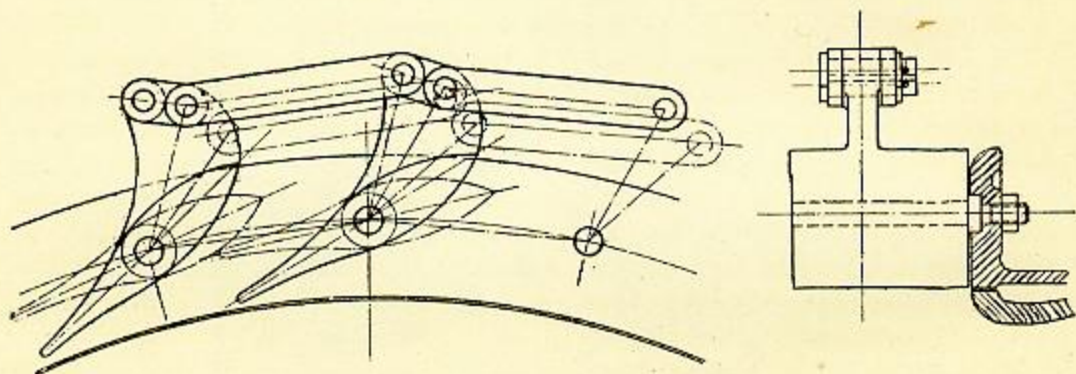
Distributor having Movable Vanes without Regulating Ring.
